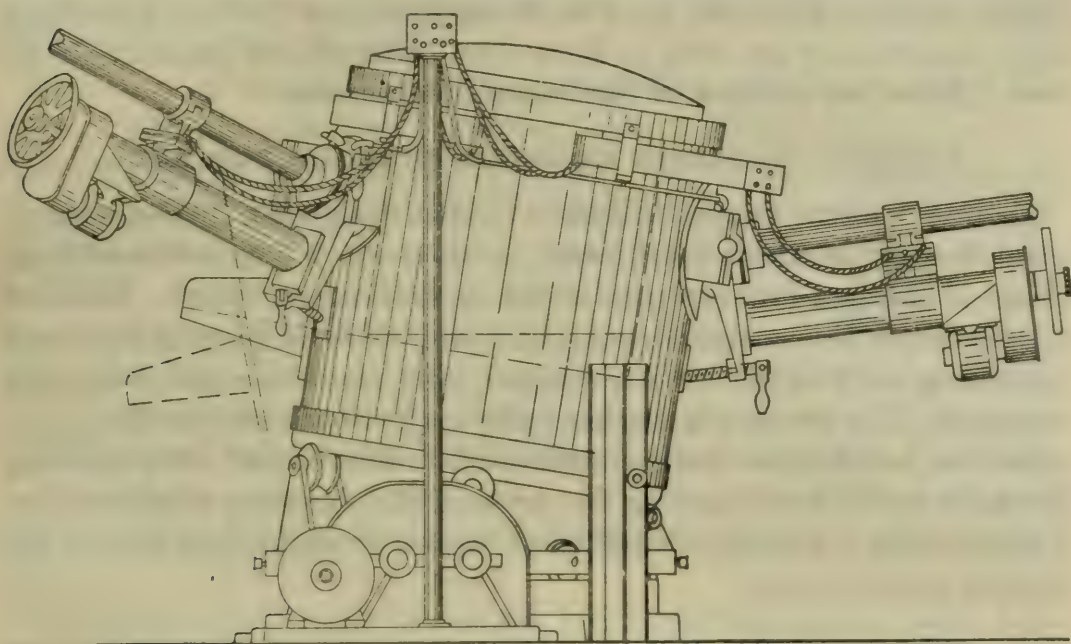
Gyrating Stassano-type furnace sold by Volta Manufacturing Co.
